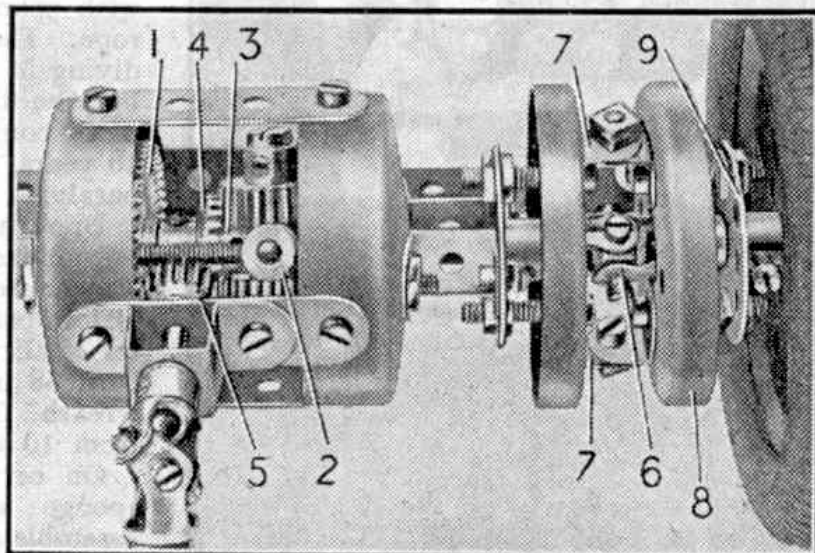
A close-up showing one wheel arrangement of the front-wheel driving mechanism.
